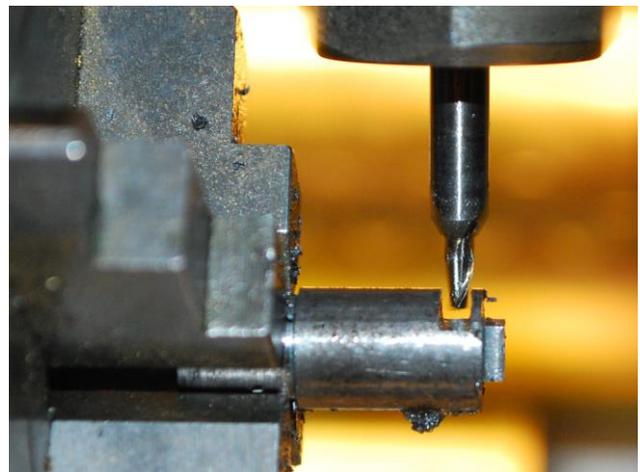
Milling the second square on the hand washer. A small 3/32" end mill is used for this cut.
